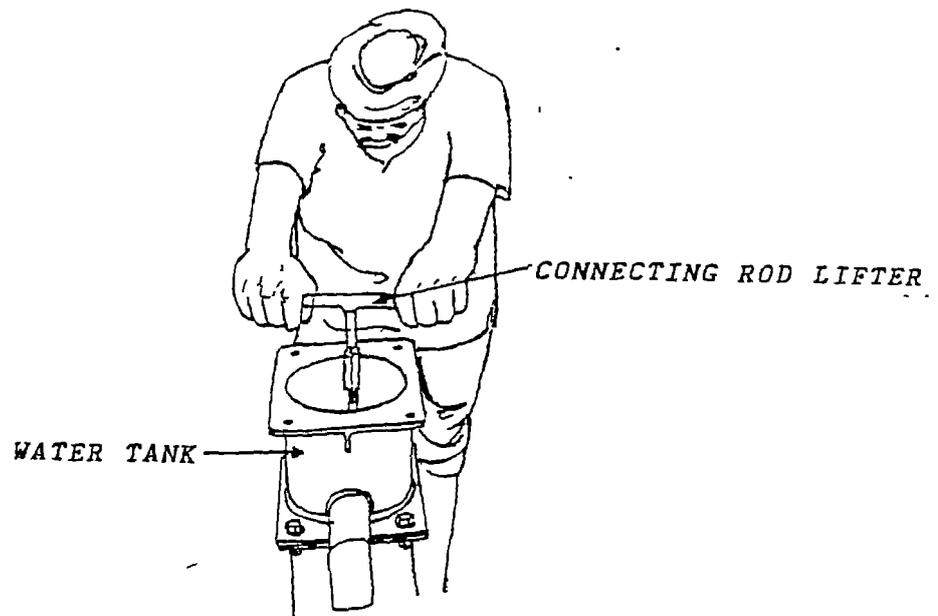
JOIN PLUNGER ASSEMBLY TO CHECK VALVE ASSEMBLY
